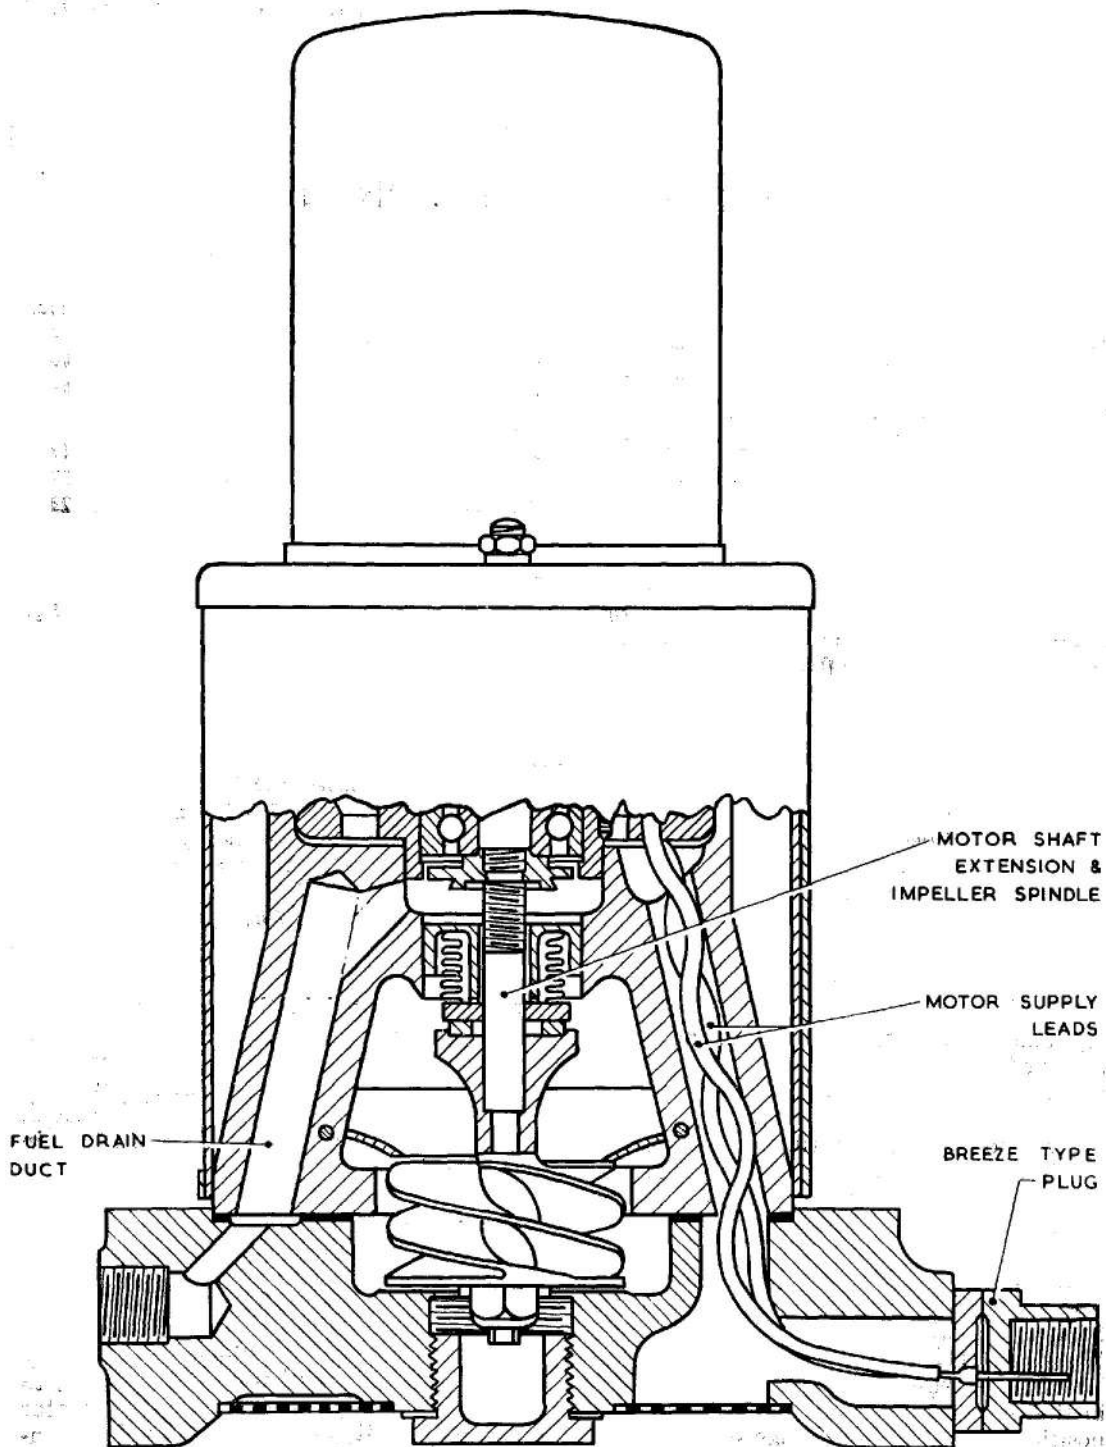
Part section view of SPE 403, Mk. I fuel pump
